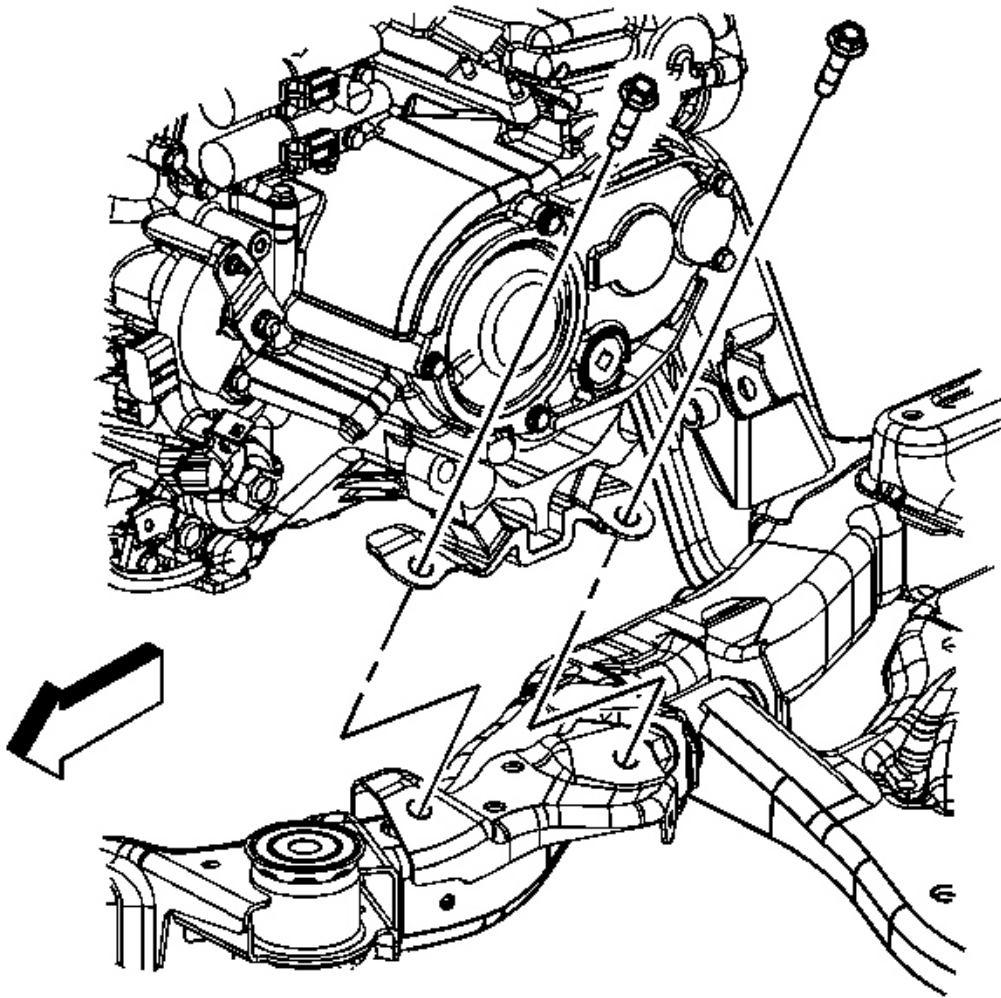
Left Transmission Mount & Frame Rail Bolts
